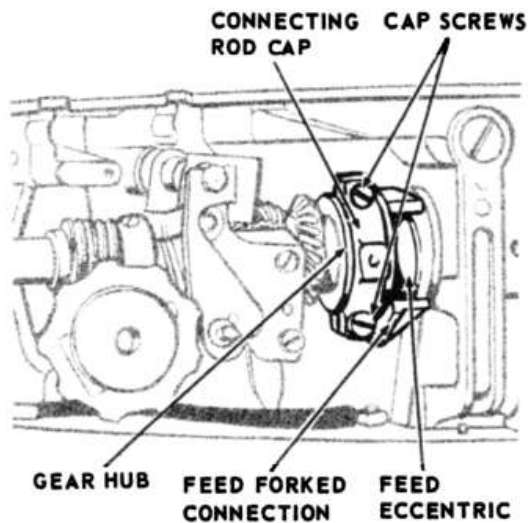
Feed Lifting Rock Shaft Connecting Rod and Feed Forked Connection
